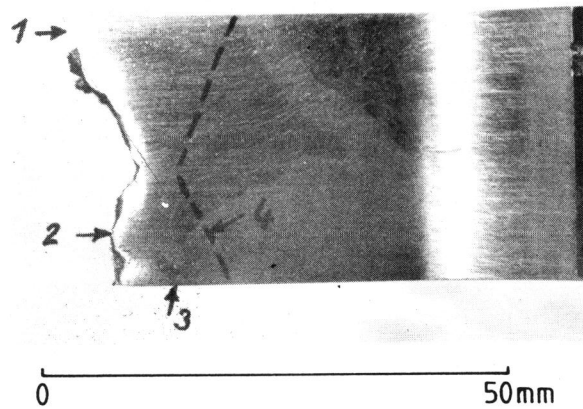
Contour of the fracture of the notched tensile specimen as shown in Fig. 5.
